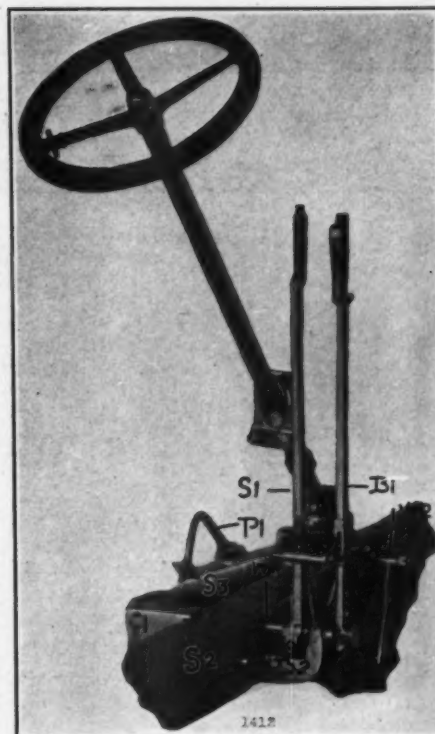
Detail of the chassis frame at the point of fastening of the side levers
